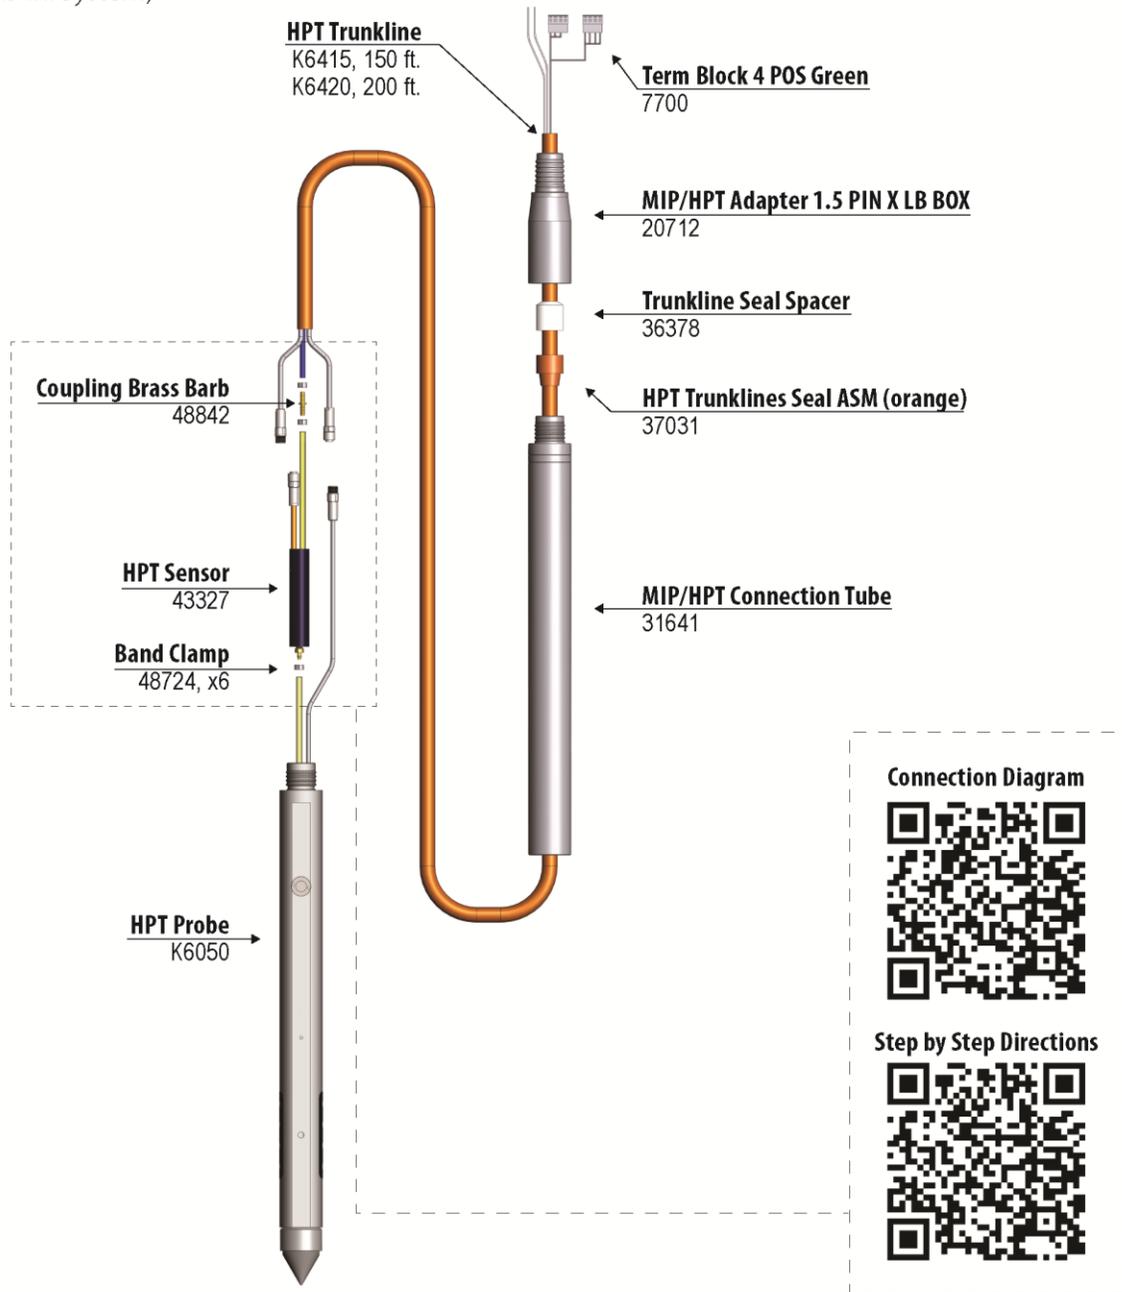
PN K6050 1.75 inch HPT Probe and components
